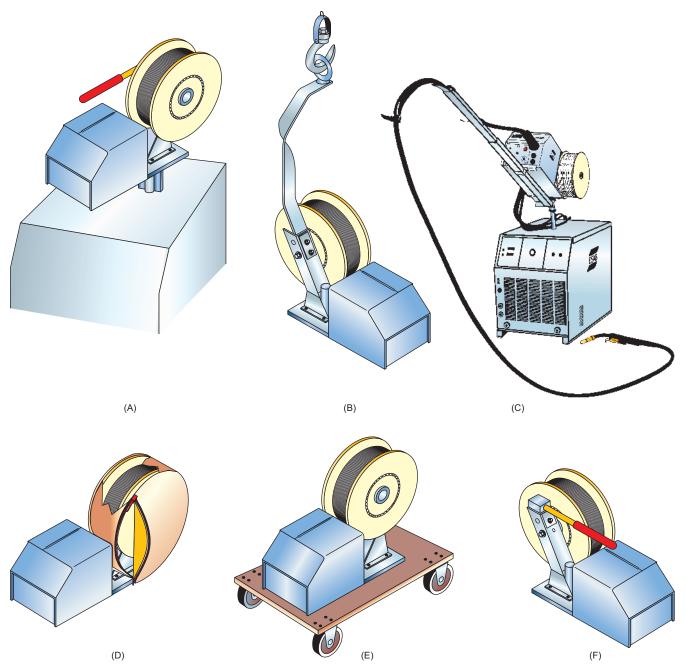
A variety of accessories is available for most electrode feed systems: (A) swivel post, (B) boom hanging bracket, (C) counterbalance mini-boom, (D) spool cover, (E) wire-feeder wheel cart, and (F) carrying handle.
